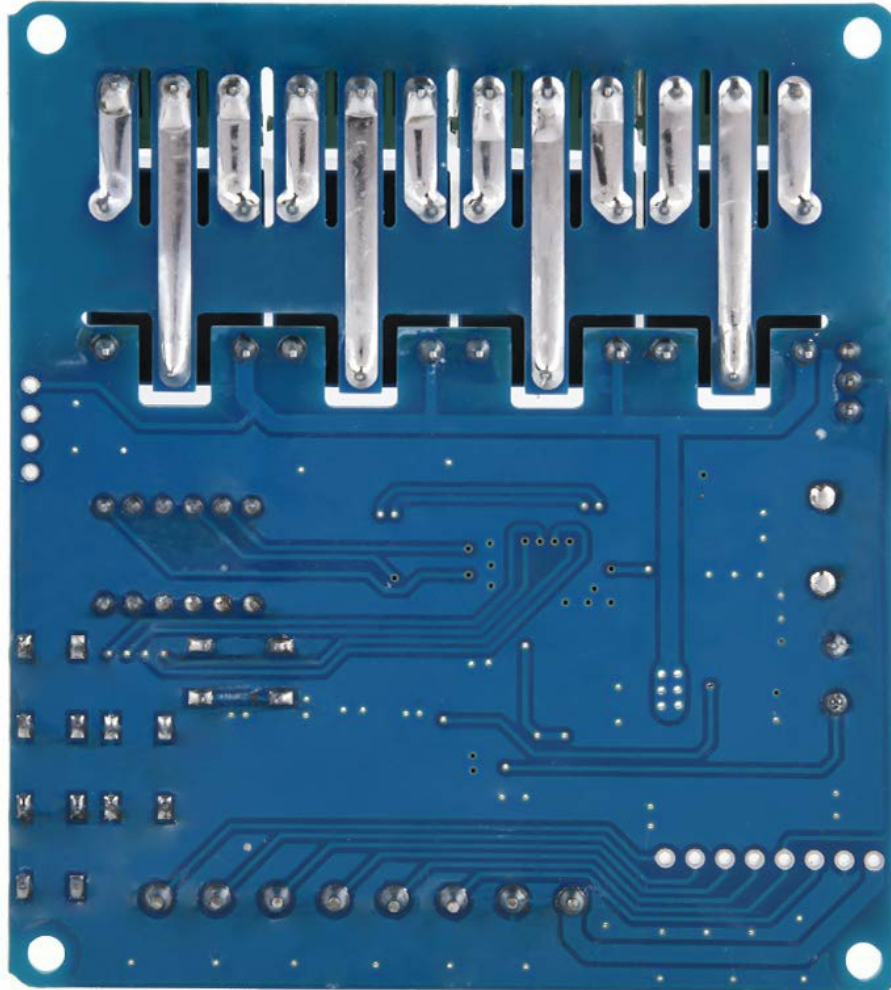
Module Bottom View. This image displays the underside of the relay module, showing the solder points and circuit board traces, which can be useful for understanding the internal layout.
